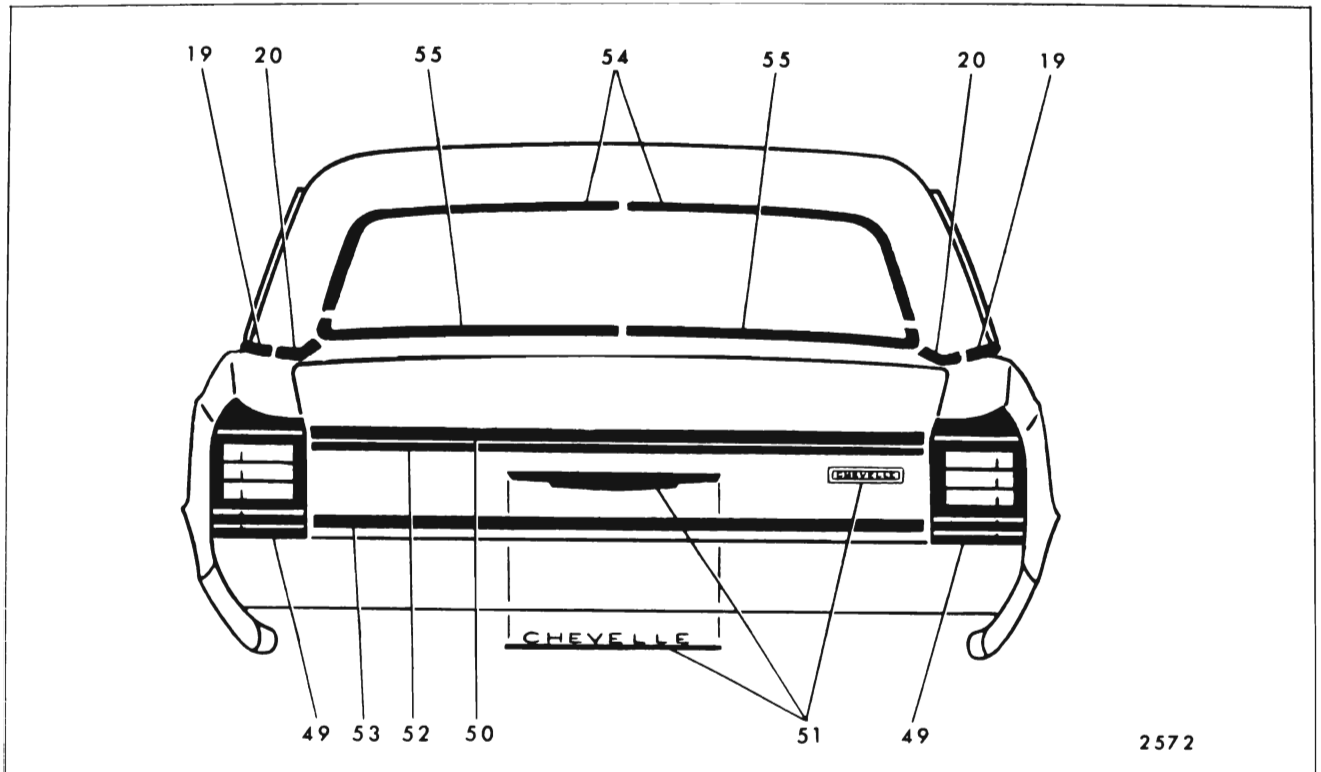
Chevrolet 13200-13400-13600 Styles (Except 35 Styles)
